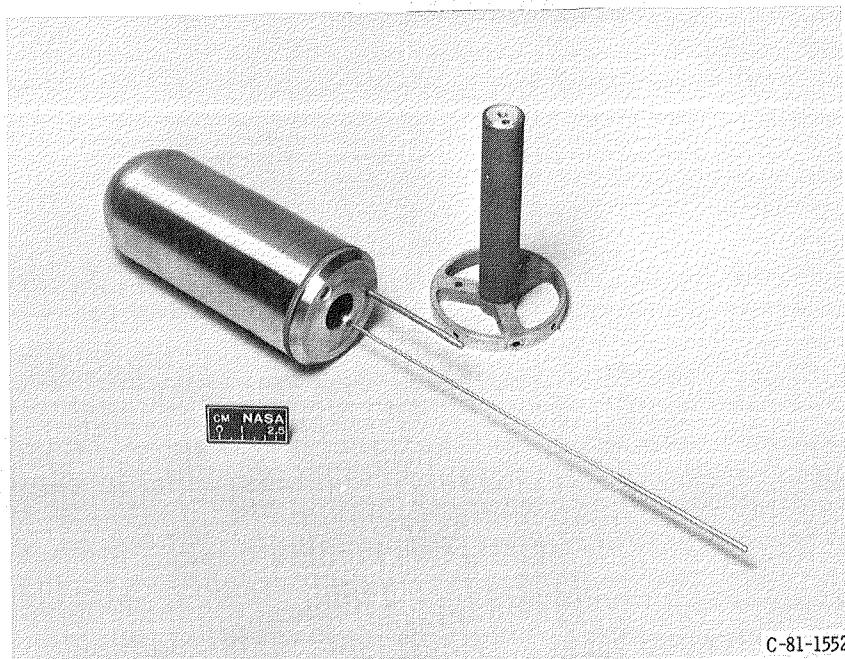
Component layout of RE-1000 Free Piston Stirling Engine.
